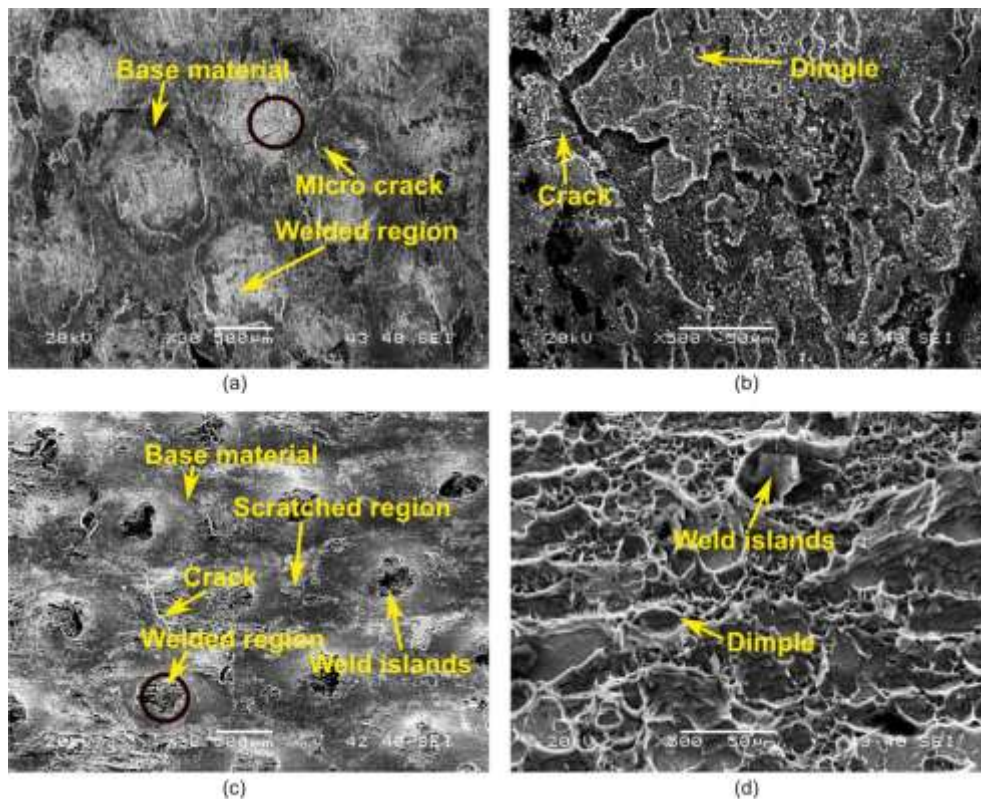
Fractured surfaces of ultrasonic welded specimens in lubricating surface condition (a) Al side surface with 30X zoom; (b) Magnified image of a; (c) SS side surface with 30X zoom; (d) Magnified image of c
